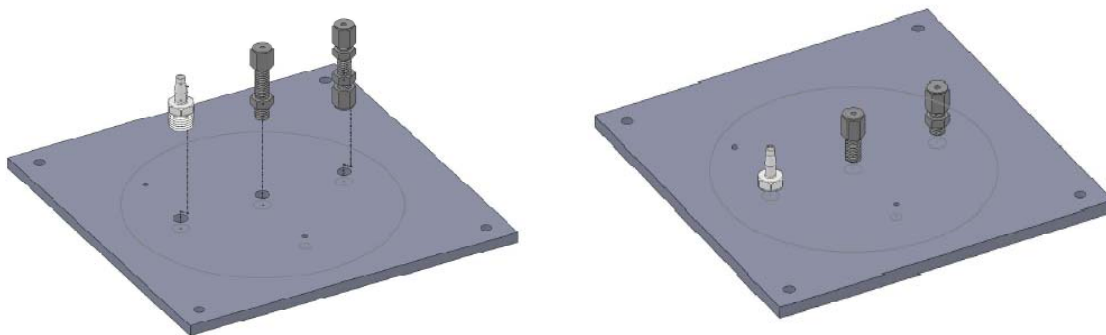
Head Plate Assembly Before (left) and after (right) installation of Barbed Fittings
